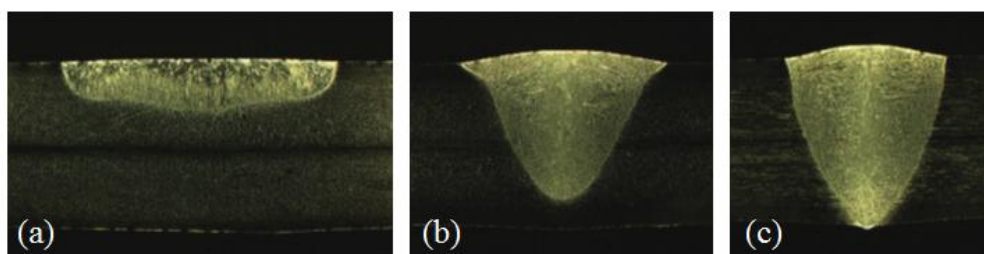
Macrostructure of (a) TIG, (b)  $TiO_2$  flux A-TIG and (c)  $SiO_2$  flux A-TIG welds produced with the same welding parameters on AISI 316L steel plates [3].
